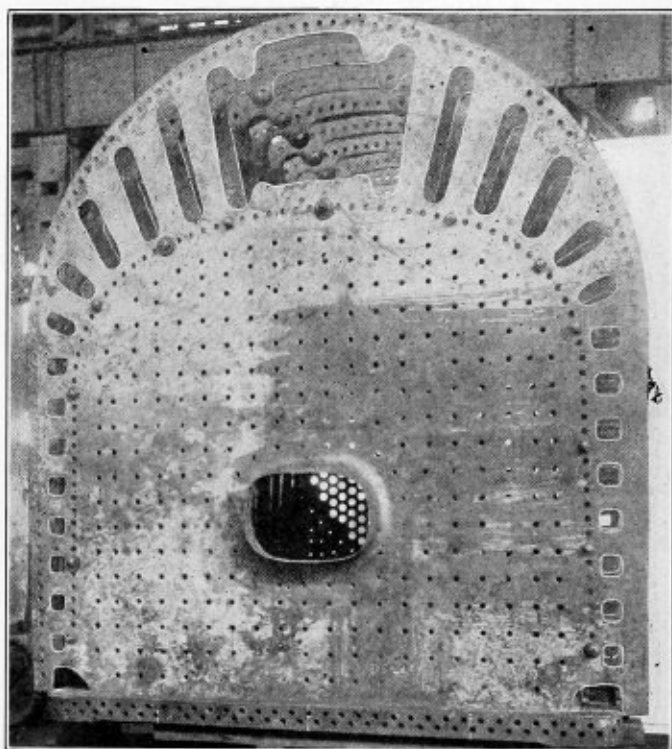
VIEW SHOWING WAY IN WHICH STAY-SHEETS ARE CUT OUT.
